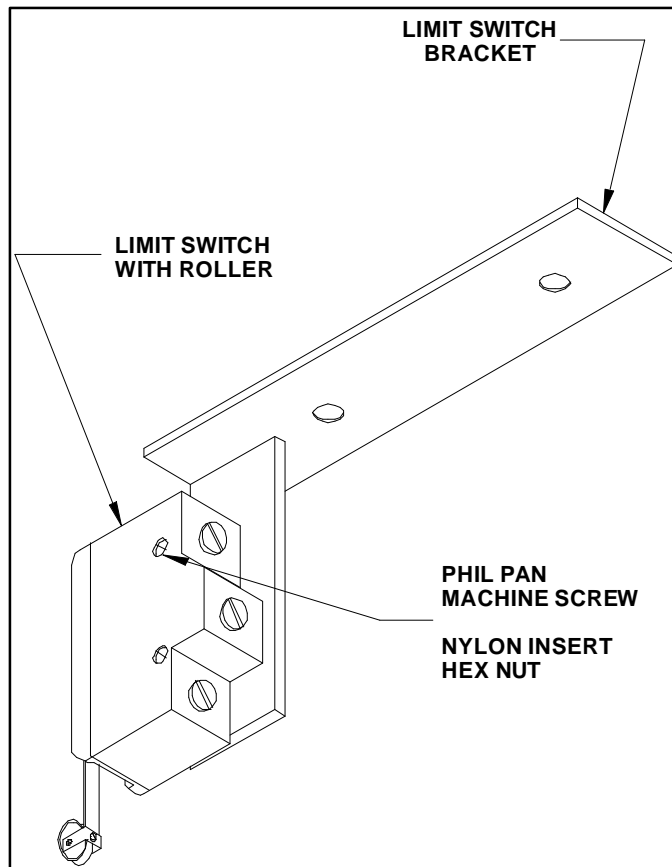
LIMIT SWITCH ATTACHMENT TO BRACKET
